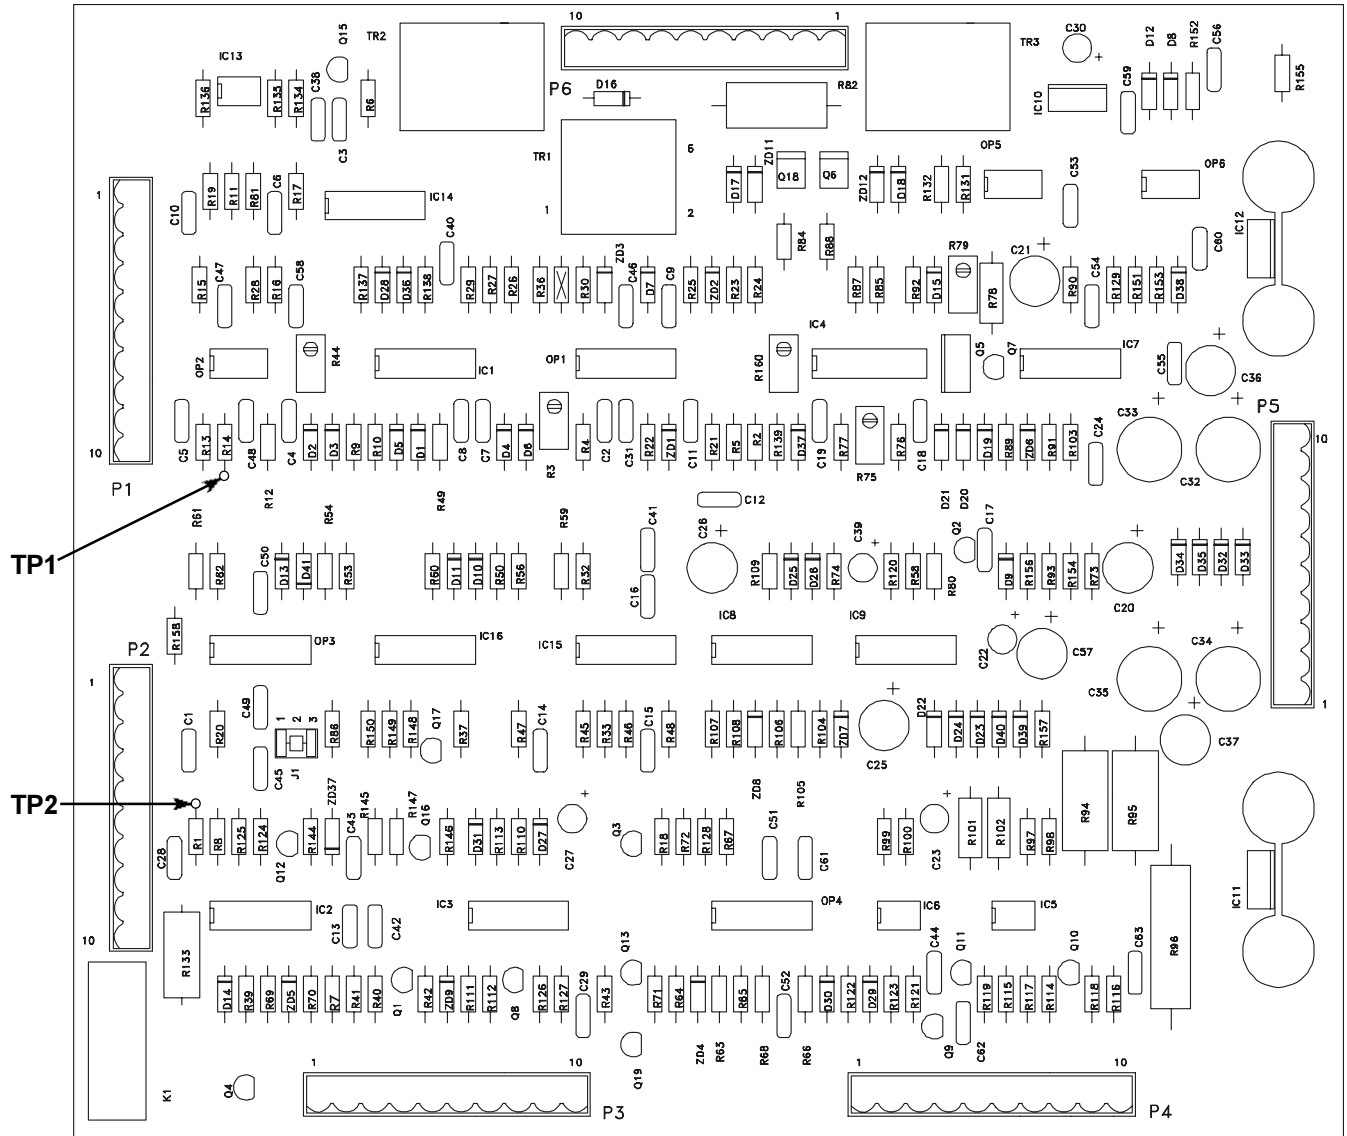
Inverter Control Board (ICB) (Top View Layout)
